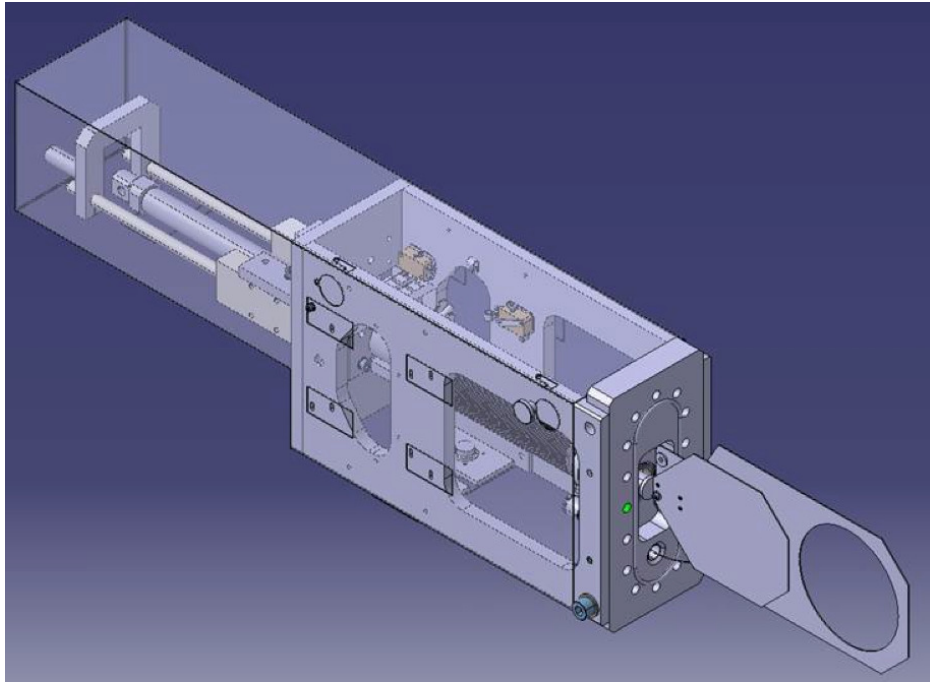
Assembly drawing of the L4L.STP beam stopper
